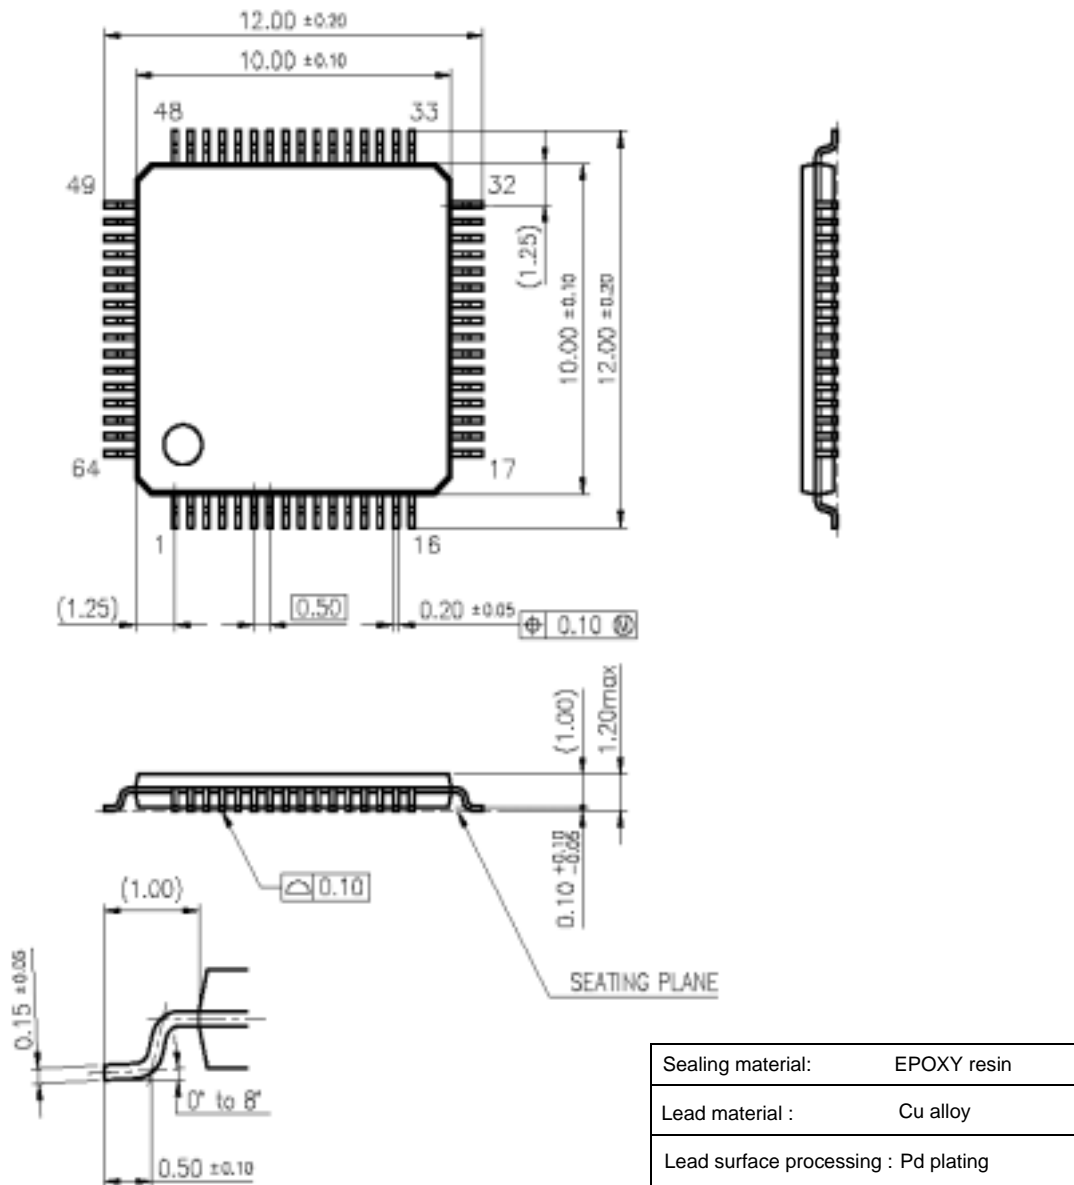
Package Dimension of MN103SFN1/N5 series (TQFP 64 pin)
